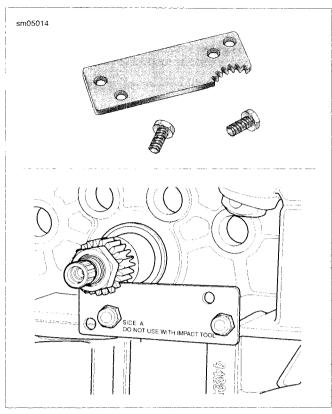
Crankshaft Locking Tool (Part No. HD-43984)
